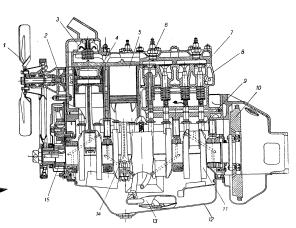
Engine Longitudinal Section 1 — fan. 2 — water pump, 3 — thermostat, 4 — piston, 5 — cylinder liner, 6 — spark plug, 7 — cylinder head, 8 — cylinder block, 9 — camshaft, 10 — flywheel, 11 — crankshaft, 12 — crankcase, 13 — oil suction bell, 14 — connecting rod, 18 — timing gears.
